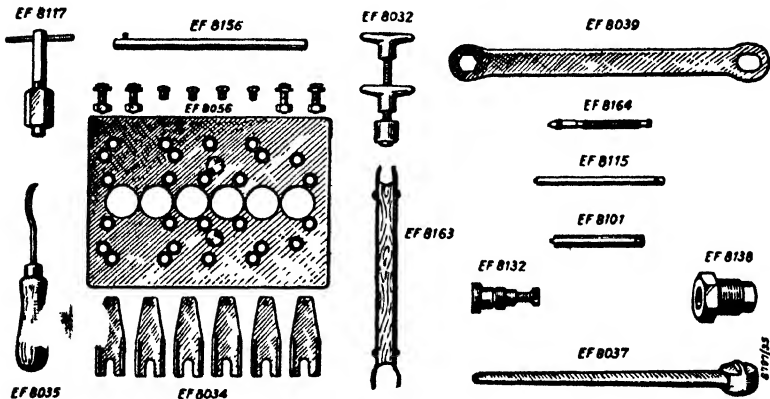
Showing Special Tools for dismantling Bosch Fuel Pump.
